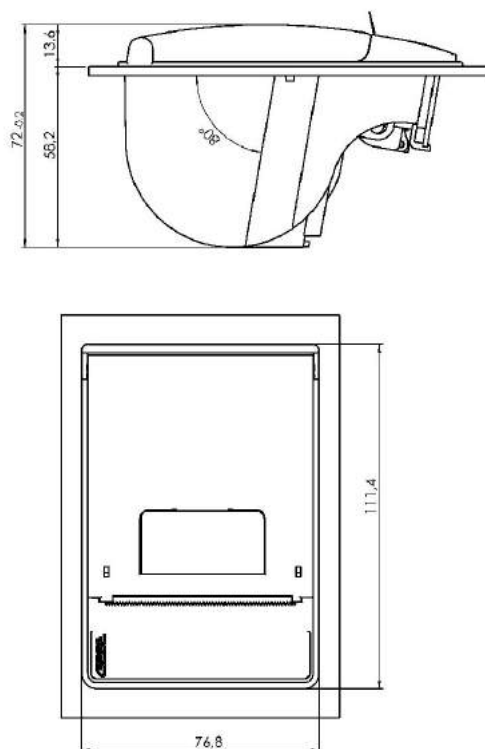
Dimensions GeBE-MULDE Mini GPT-4352-60 in mm
